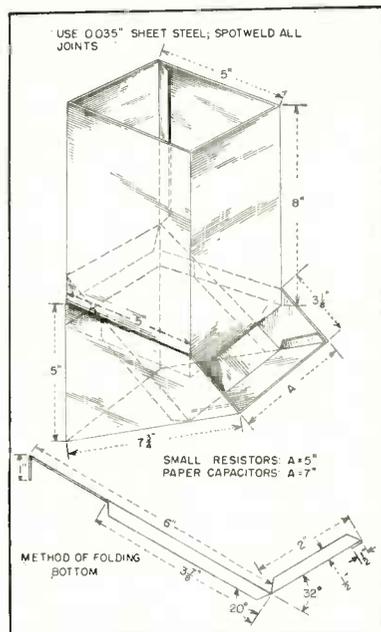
Metal-shop guide for cutting and welding feed bins for small parts. For longer parts, width is increased
